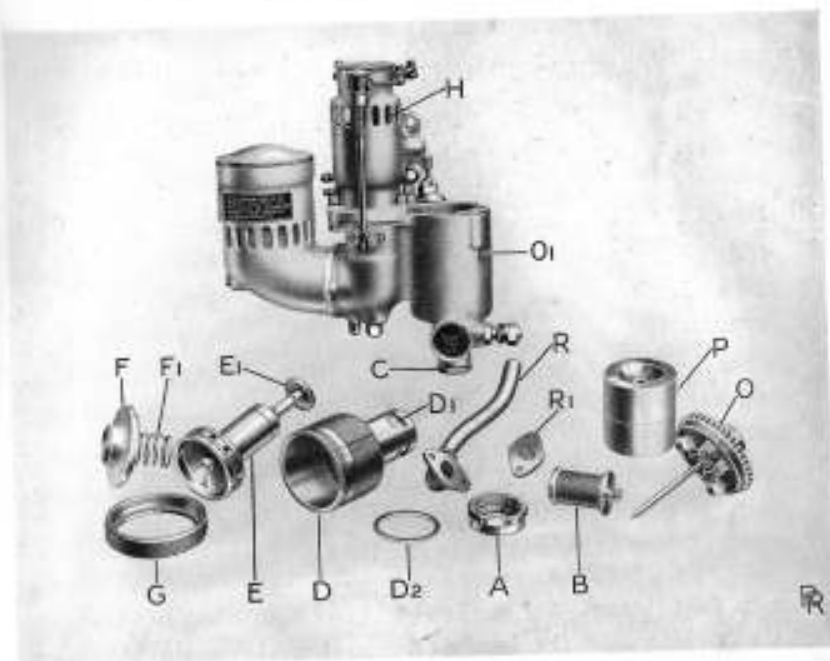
CARBURETTER, WITH CERTAIN PARTS DISMANTLED.
